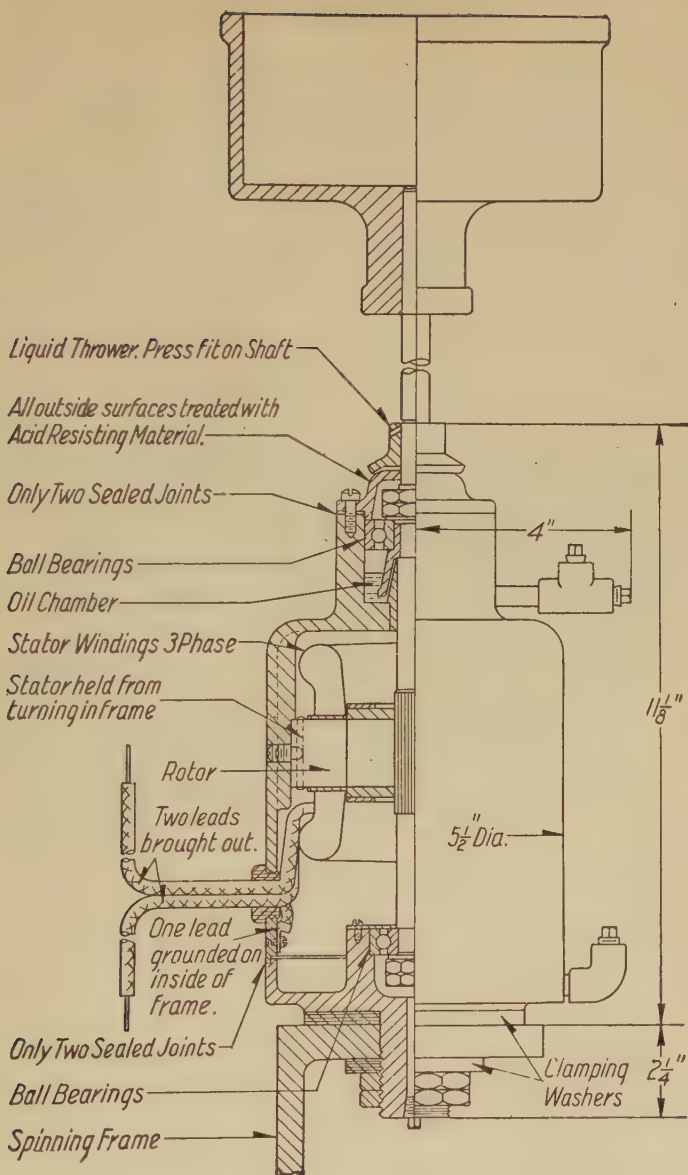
Spinning Pot or Box, Motor Driven (Courtesy of Westinghouse Company.)
